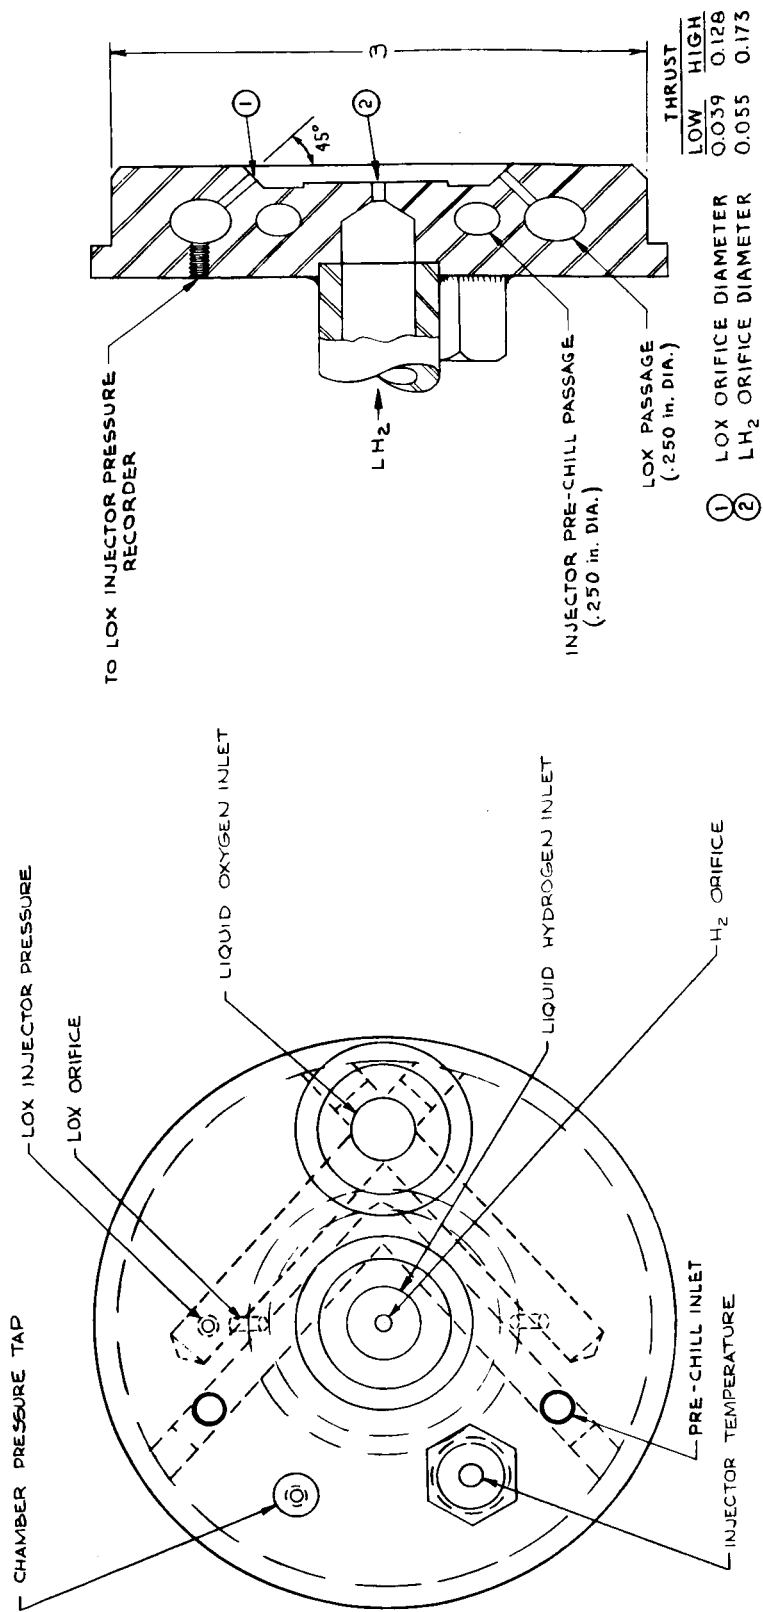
TRIPLET INJECTOR ASSEMBLY
